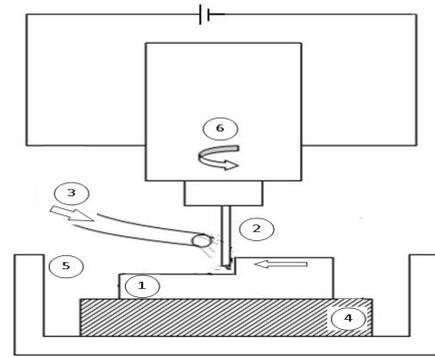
Schematic diagram of micro ED milling (1: workpiece, 2: electrode, 3: dielectric channel, 4: workpiece base, 5: dielectric tank and 6: spindle)
